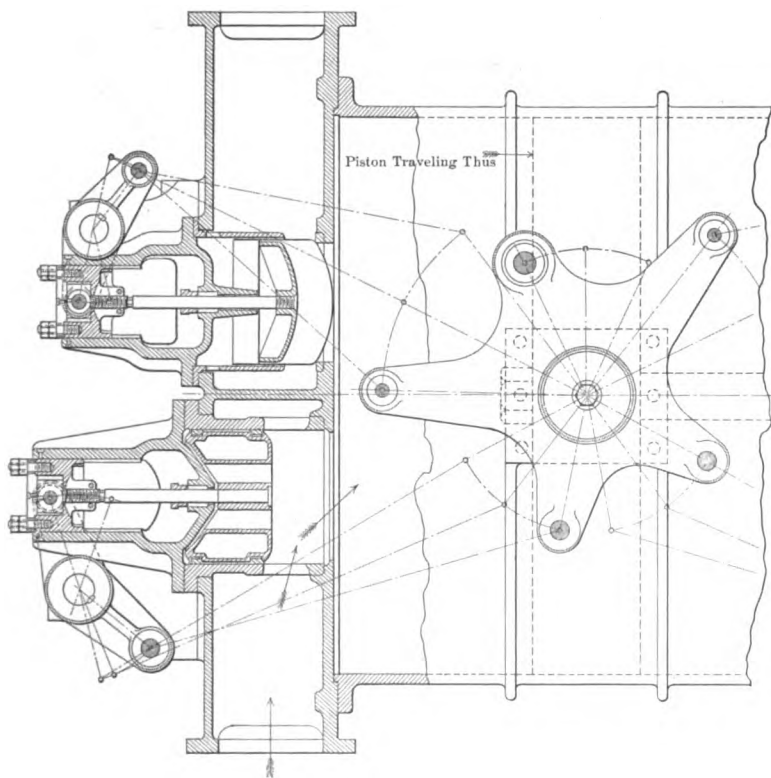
VALVE GEAR BUILT BY ALLIS COMPANY
